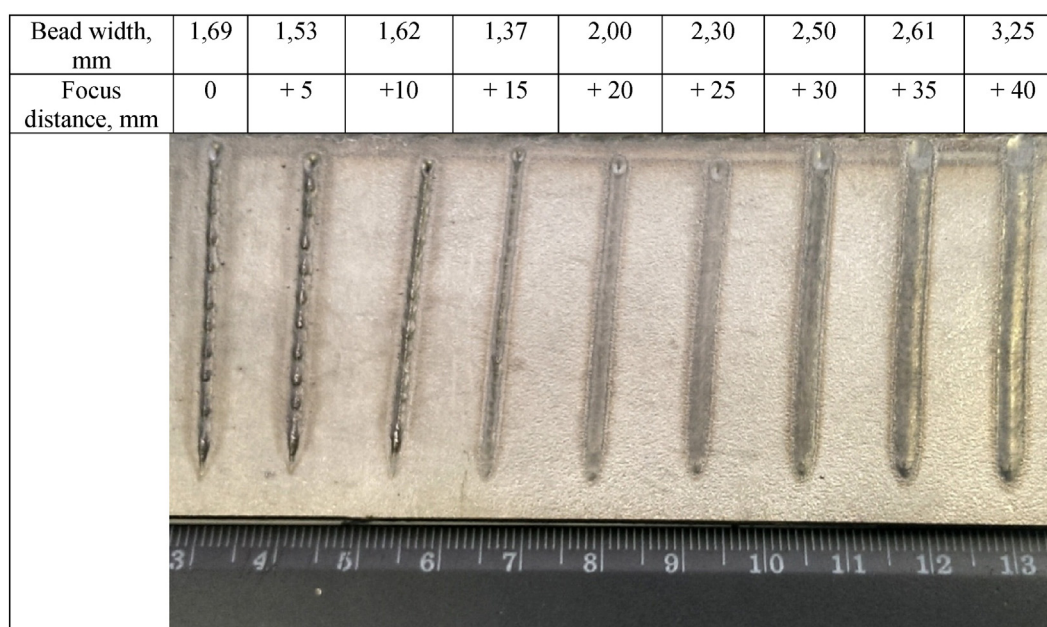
Bead-on-plate test, welding speed 20 mm/s, laser power 1 kW.
